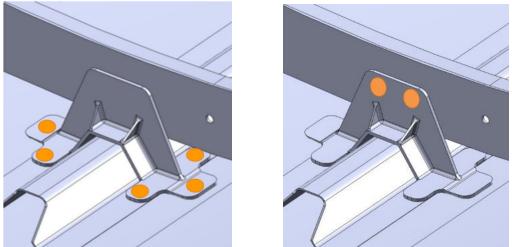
Weld spot locations on the frame clips. Clip-skin joint location (left) and Clip-frame joint location (right)
